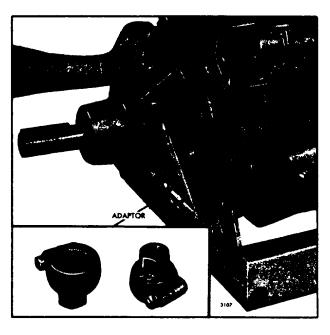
Checking Clutch Adjustment with a Torque Wrench and Adaptor
